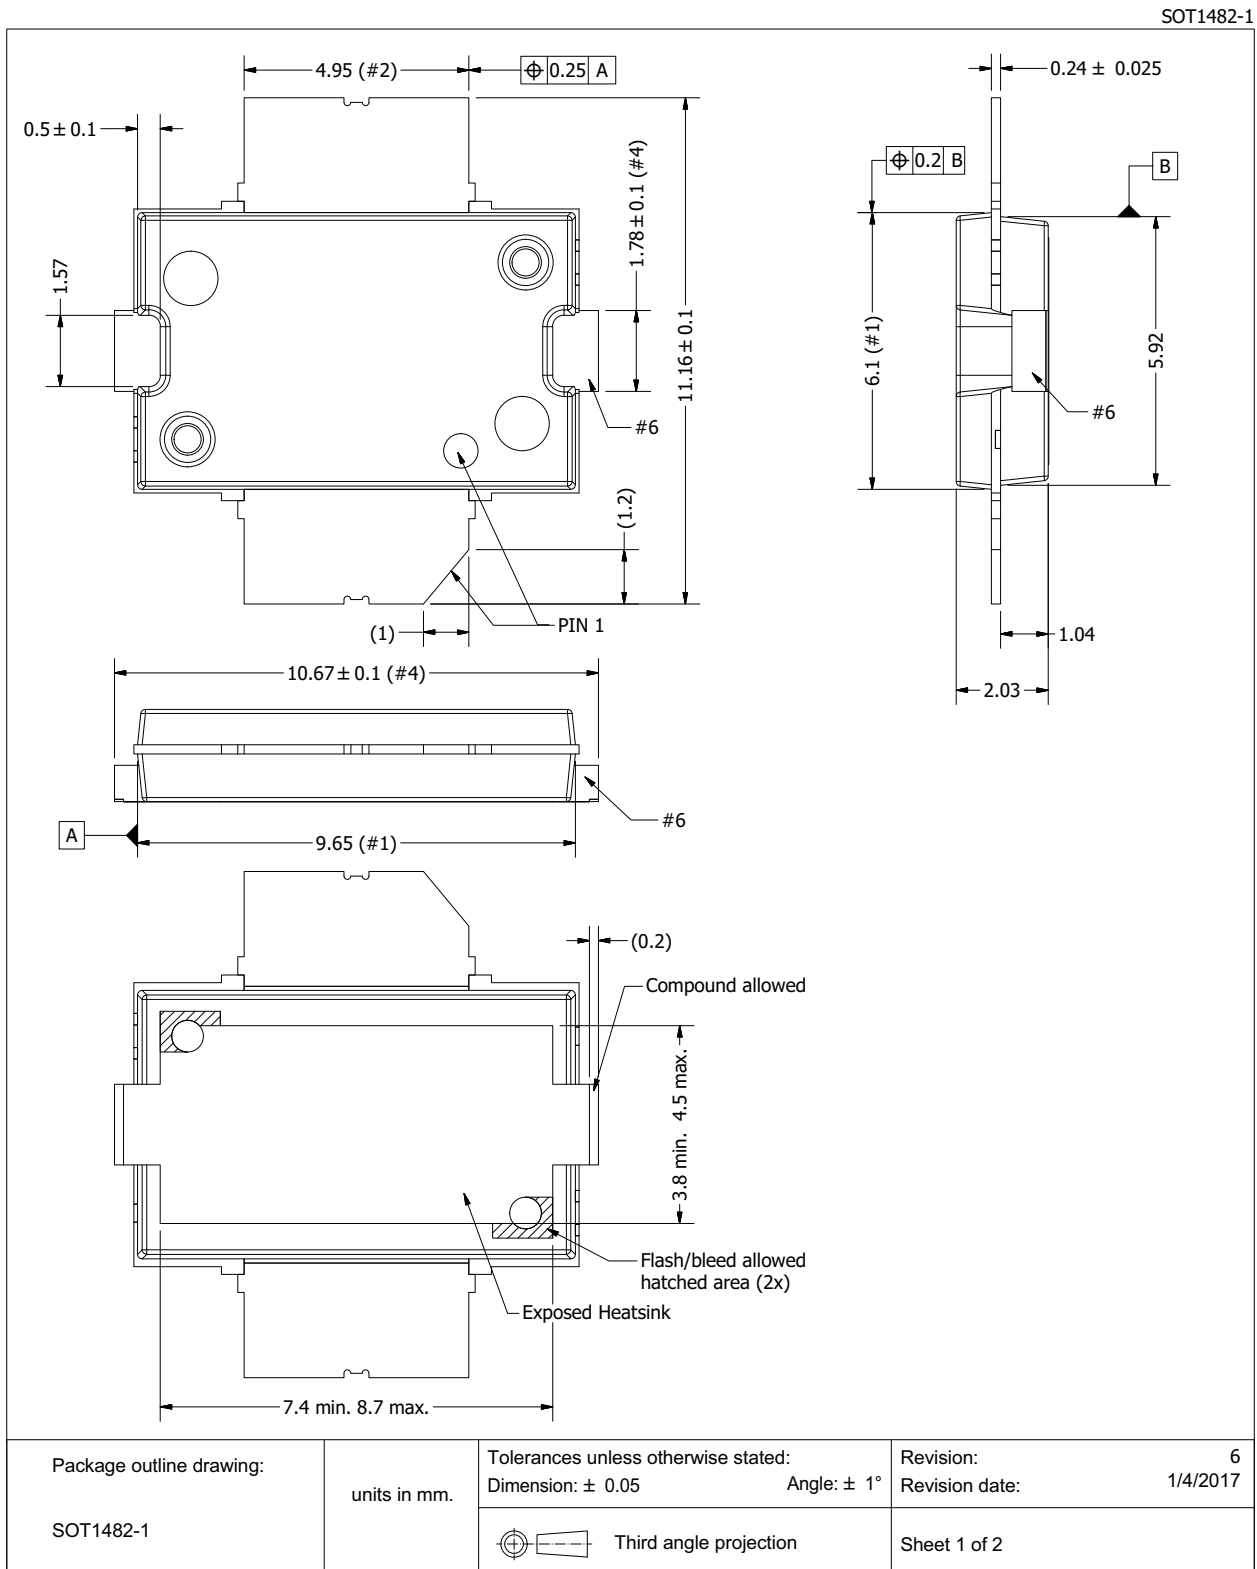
Package outline SOT1482-1 (sheet 1 of 2)
